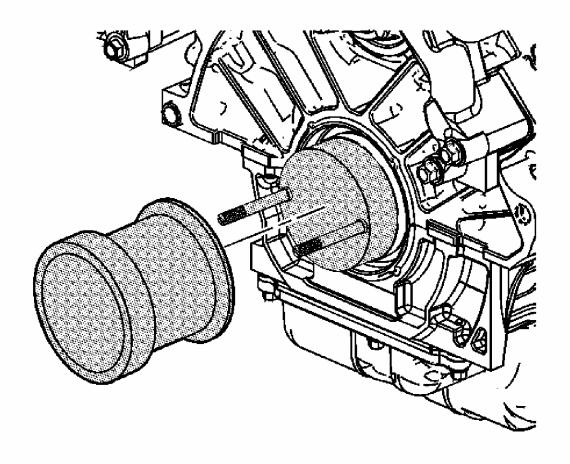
View Of Rear Seal Applicator Housing Courtesy of GENERAL MOTORS CORP.
